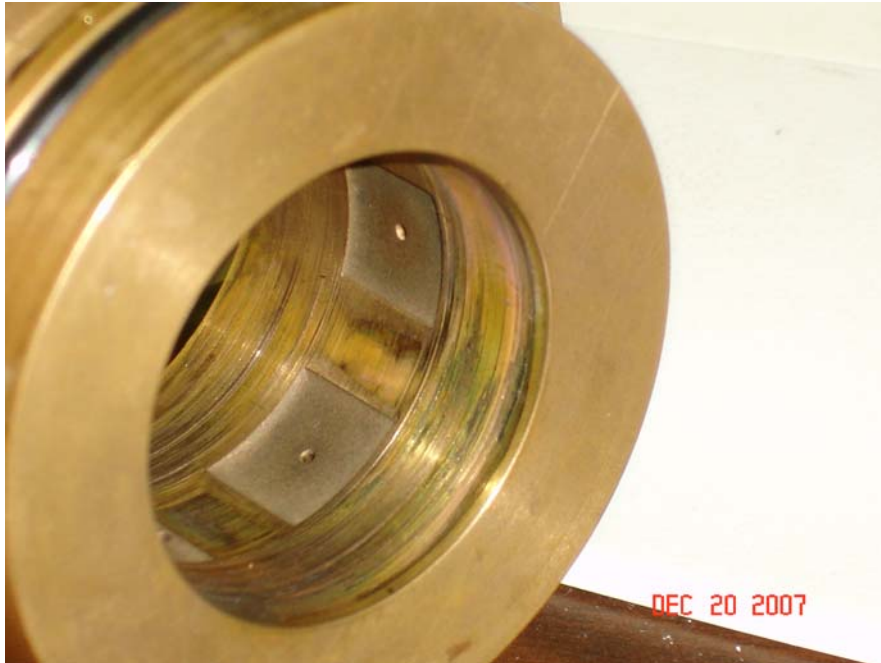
Burnishing and pitting of the test bearing after completed testing.
